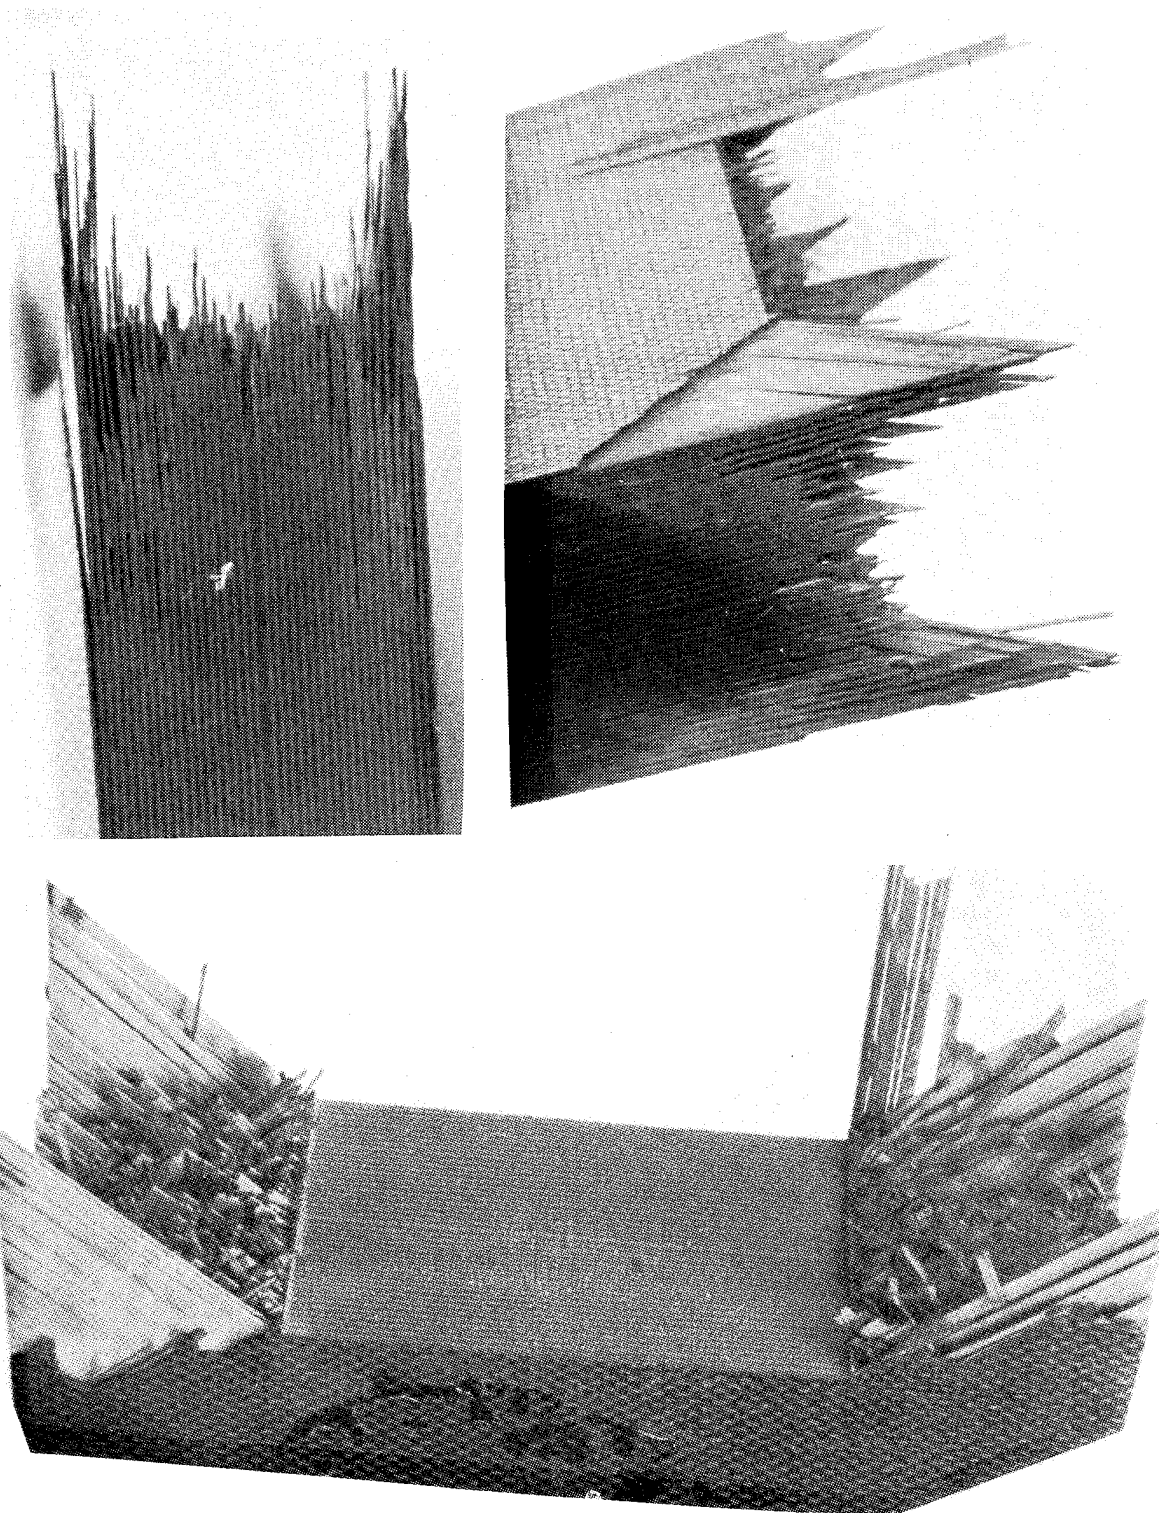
Photographs of the Fracture Surface of Several 120 Ply $[0/\pm 45]_{ns}$ Specimens
